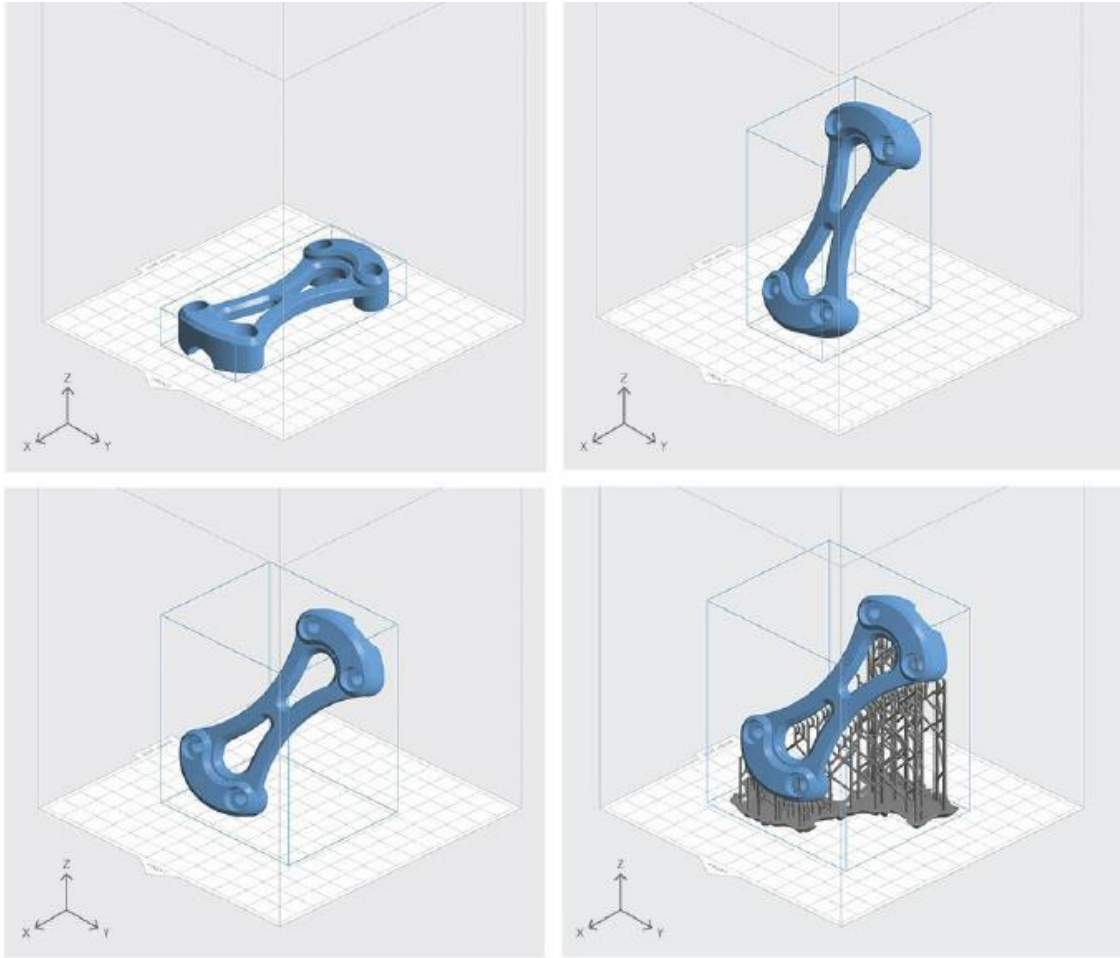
Orienting a part to be printed in SLA/DLS [37].
